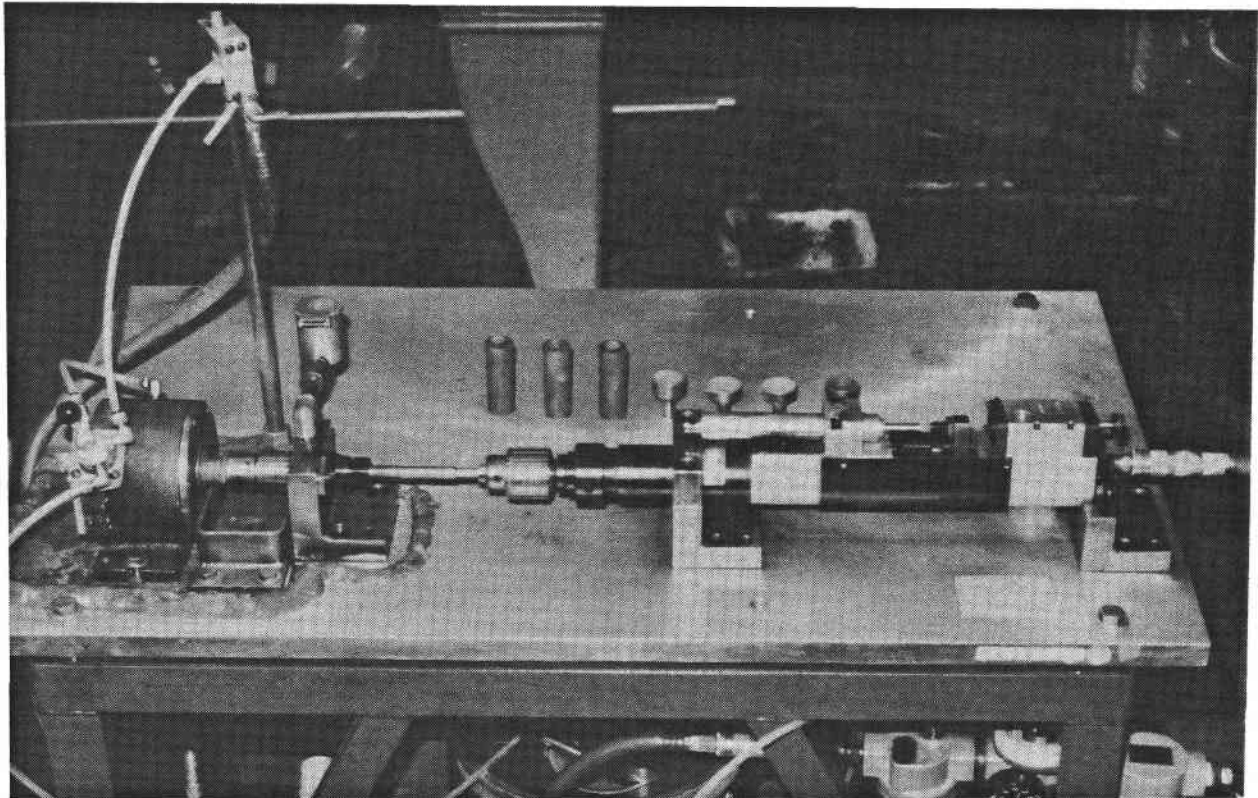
Ball and Socket Joint (Pneumatic Controlled Grinding Fixture)
